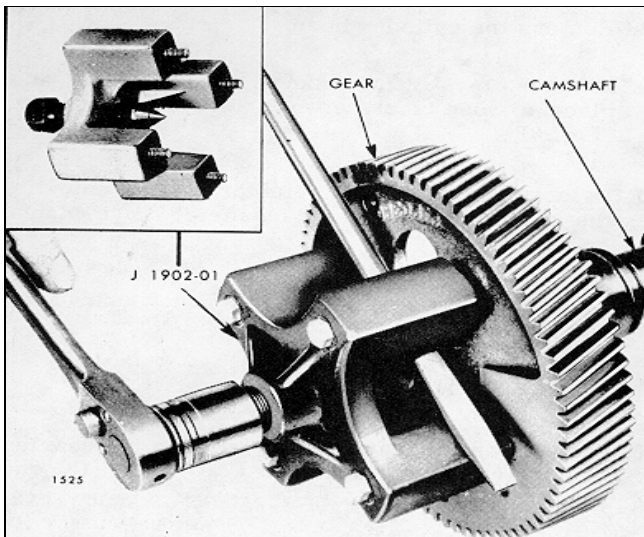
Removing Gear (Camshaft or Balance Shaft Gear Puller J 1902-01)
